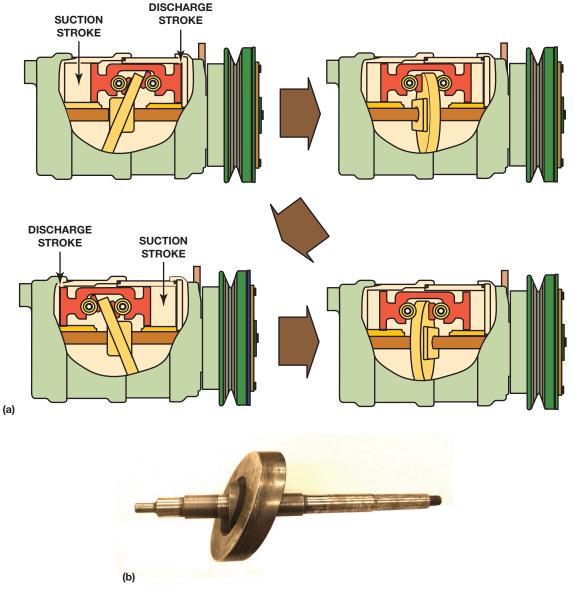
(a) One of the double pistons of a swash-plate compressor as it move through a pumping cycle. (b) A compressor shaft with the swash plate.
